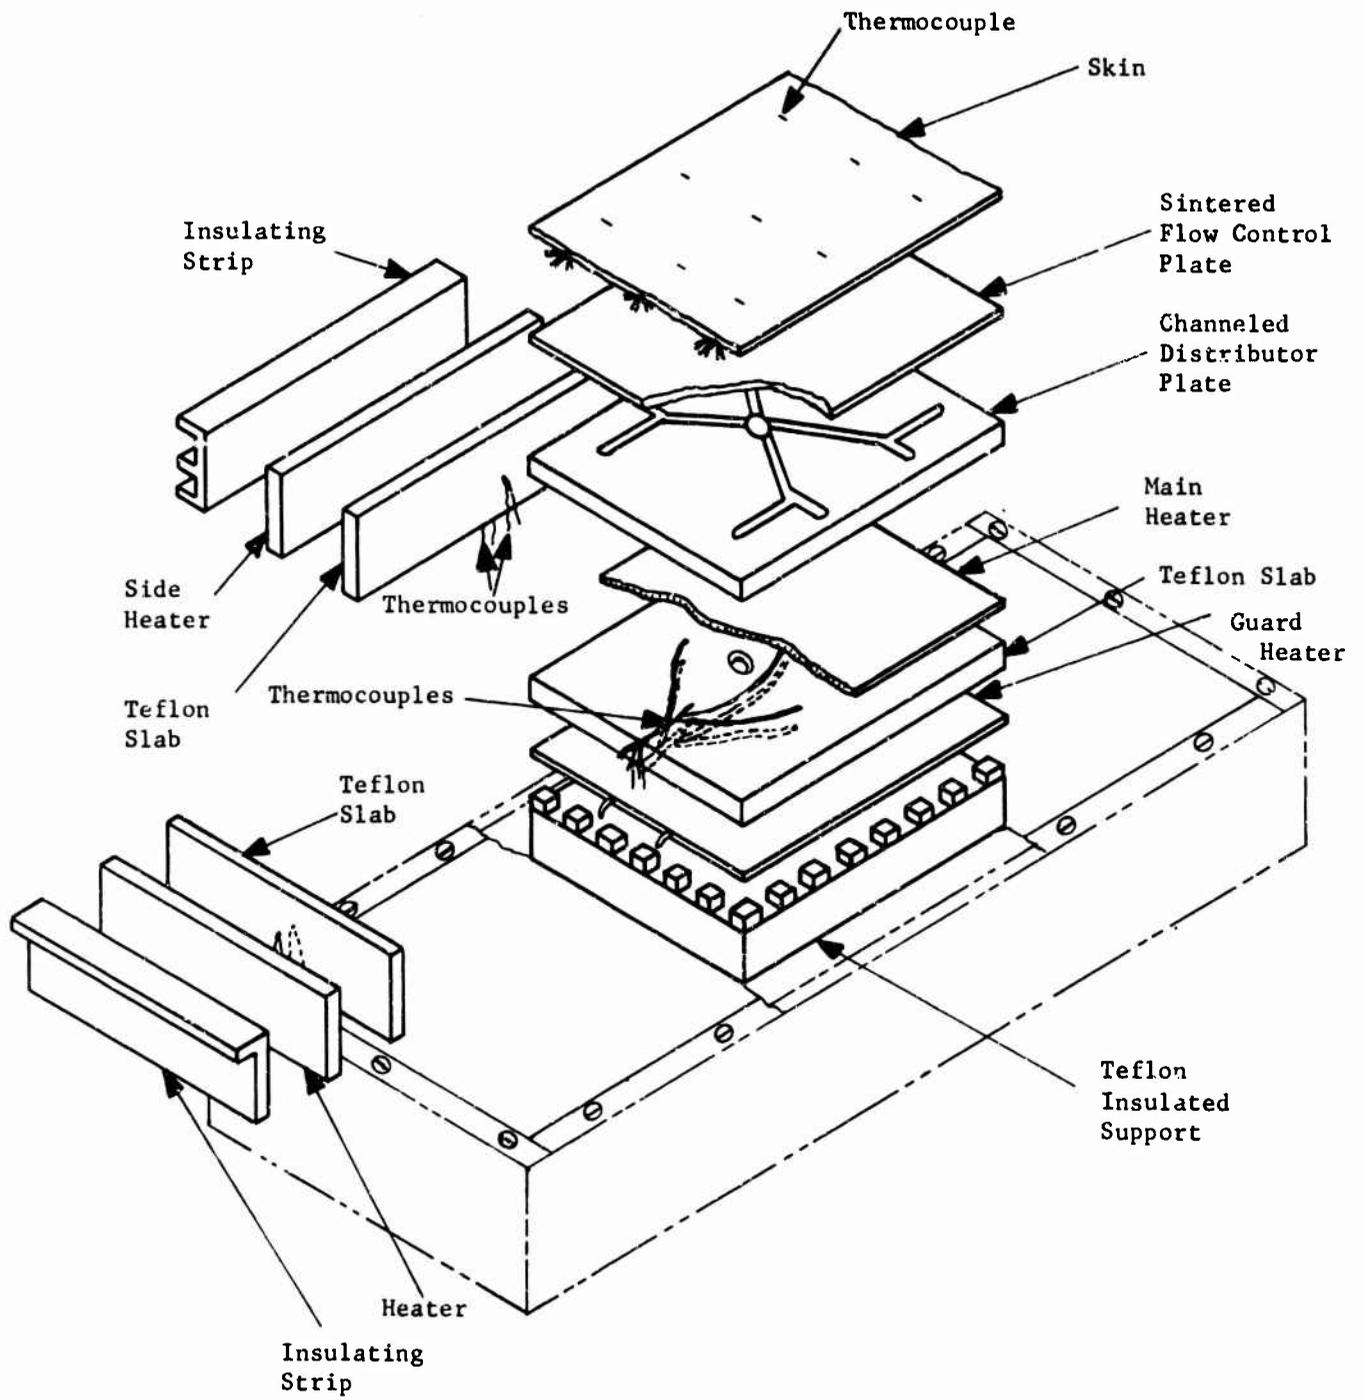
CENTER TEST PANEL OF SKIN SIMULATOR MODEL
